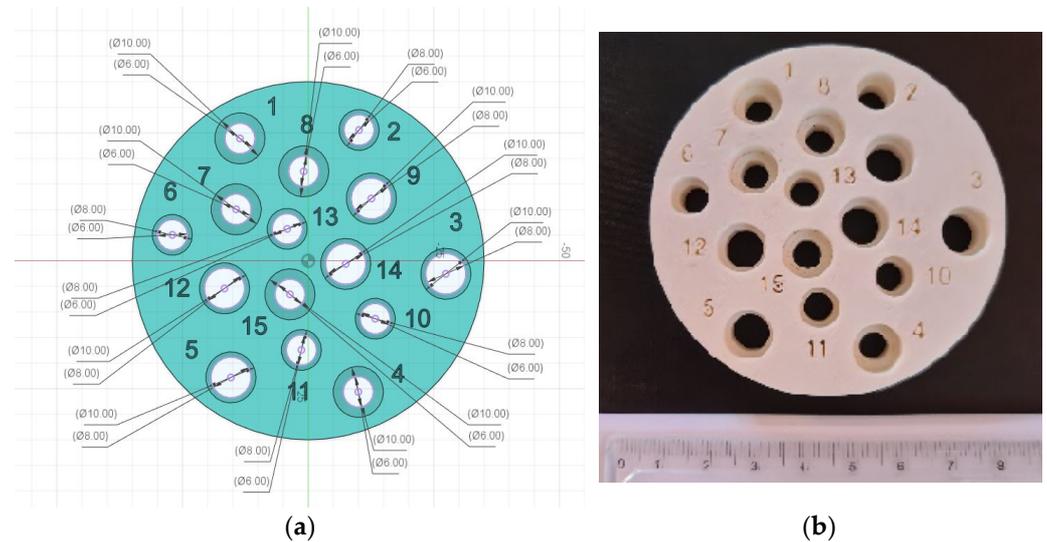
3D CAD model of test part 1 (a); Example of a test part with counterbore vertical axis holes for the experiment 1 (specimen 16) (b).
